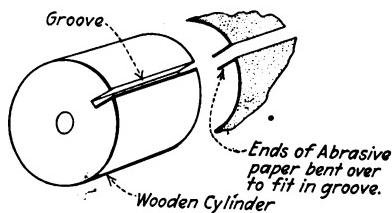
Mounting abrasive paper or cloth on a small wooden cylinder for use in the lathe
